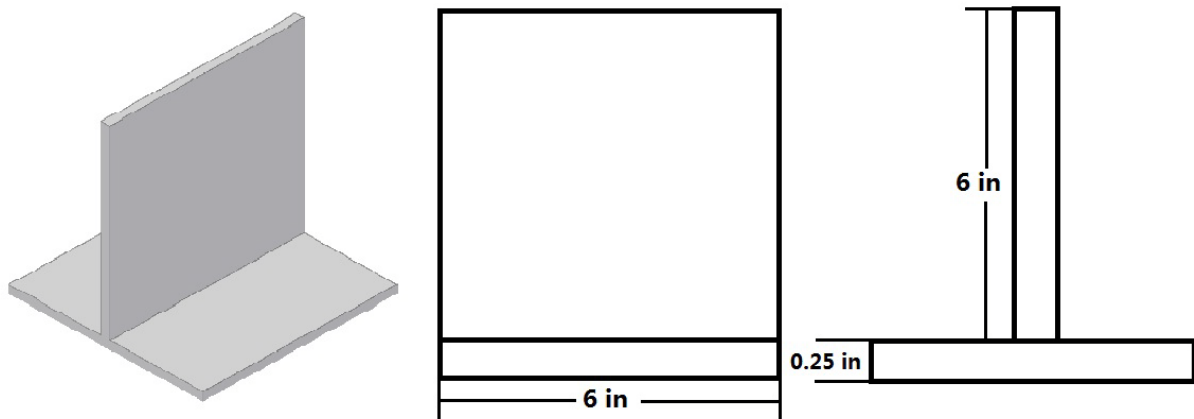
and Dimension of Welding Joint Crack Samples
